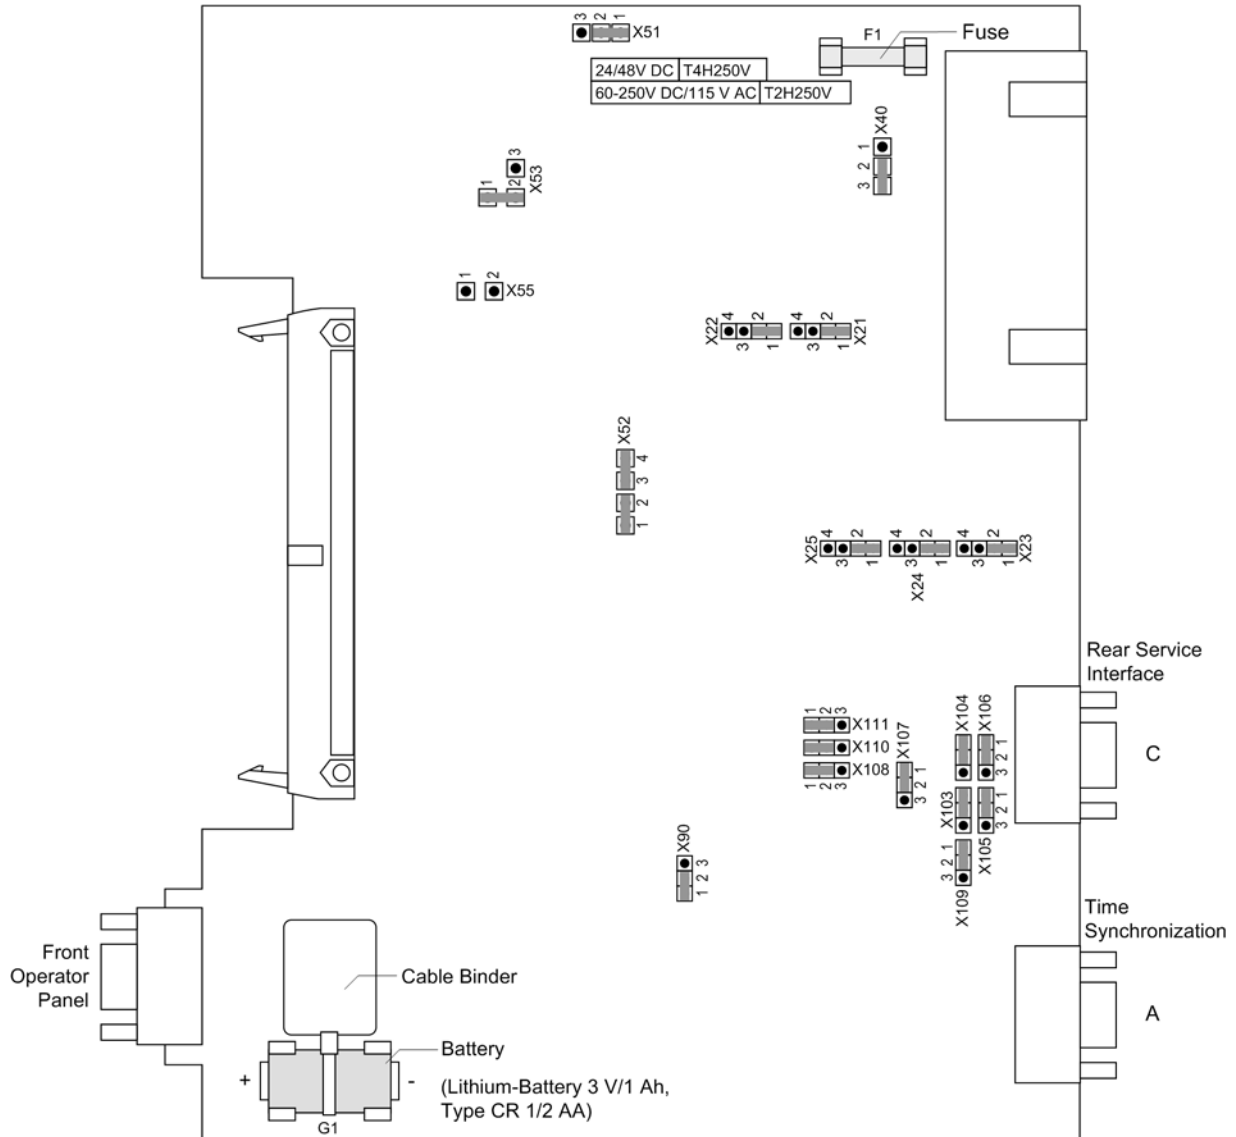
Processor printed circuit board C–CPU-2 with jumpers settings required for the board configuration
